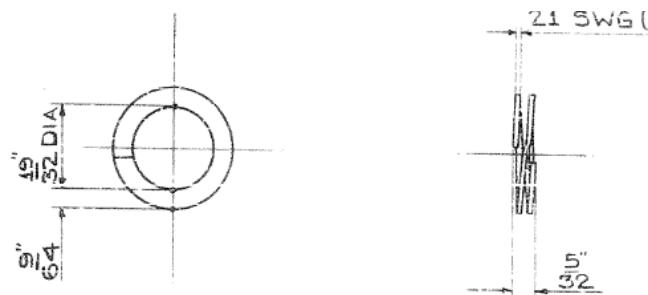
Double coil spring for rocker shaft 2A18.
